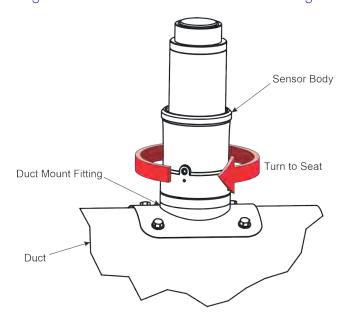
Attaching the Meridian Sensor to the Duct Mount Fitting
